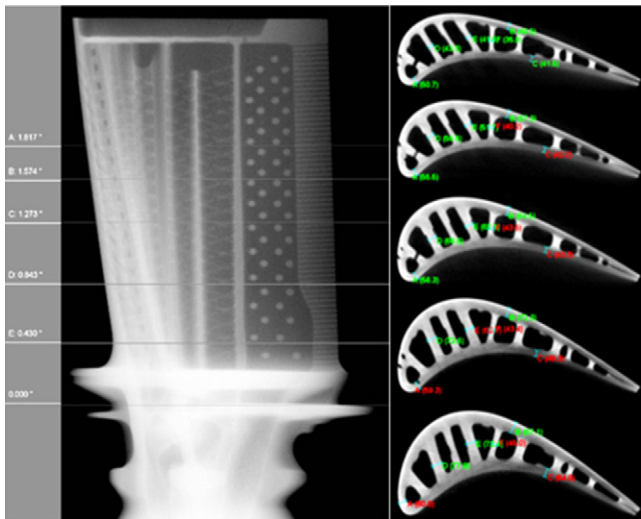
Dimensional CT measurement on turbine blade (Courtesy Nikon-Metrology/X-Tek).
